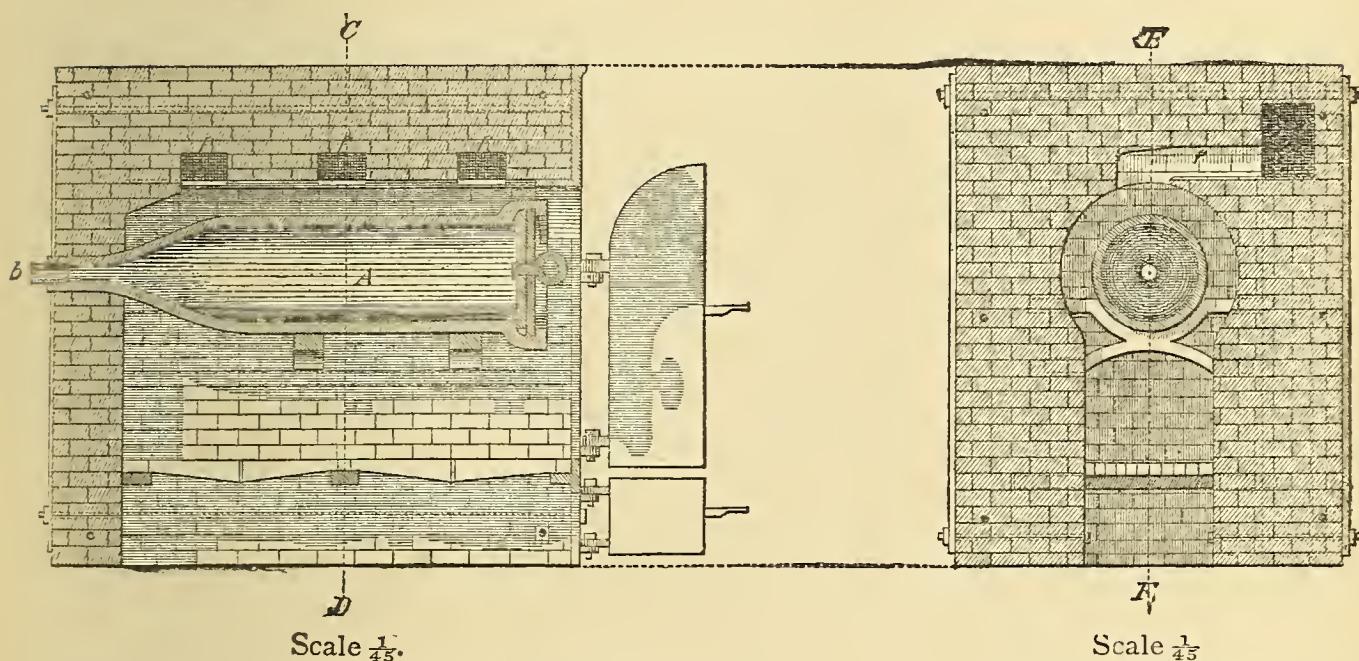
LONGITUDINAL SECTION OF RETORT.
